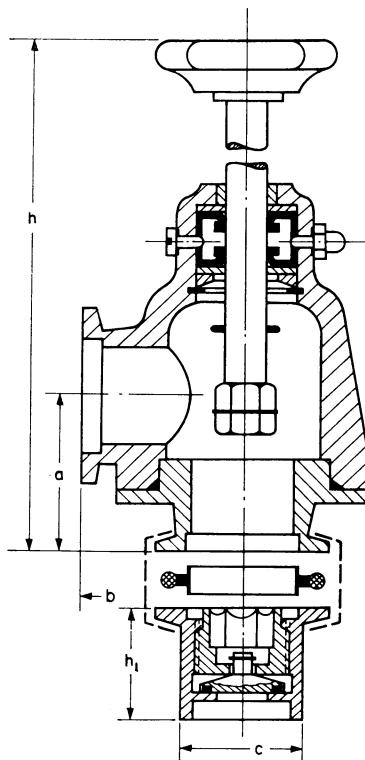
Section view of Leybold⁷⁶² seal-off valve (dimensions see Table 6.25)
